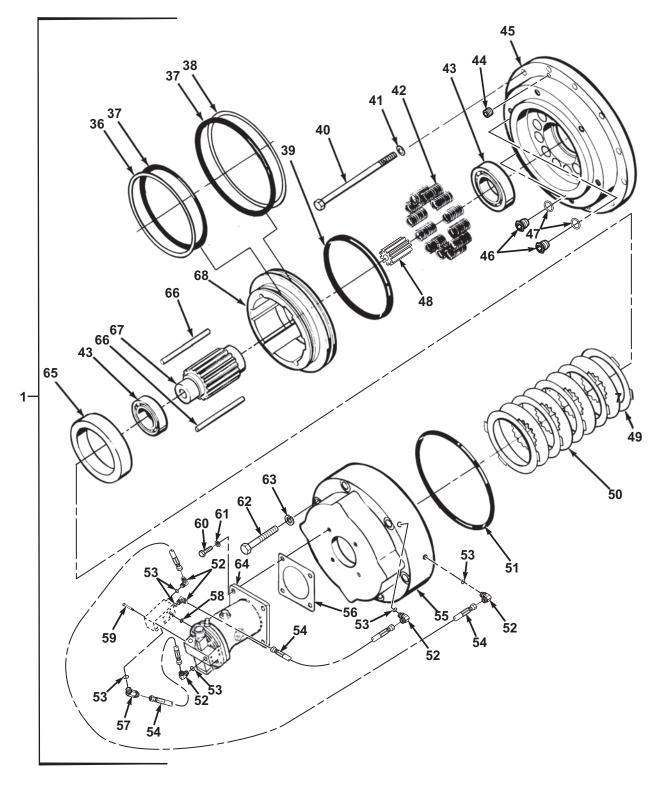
WINCH ASSEMBLY (Sheet 2 of 5)
